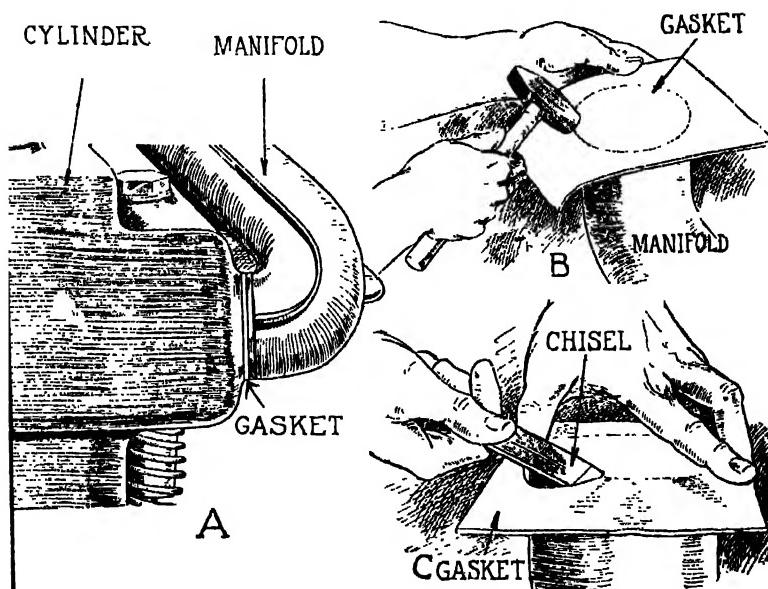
Method of Cutting Inlet Manifold Gasket.
